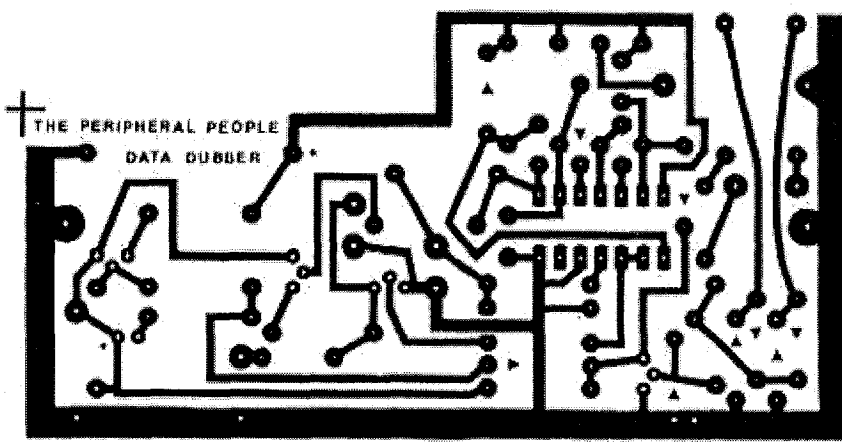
Artwork and component layout for the circuit board. Note—this drawing is actual size.
